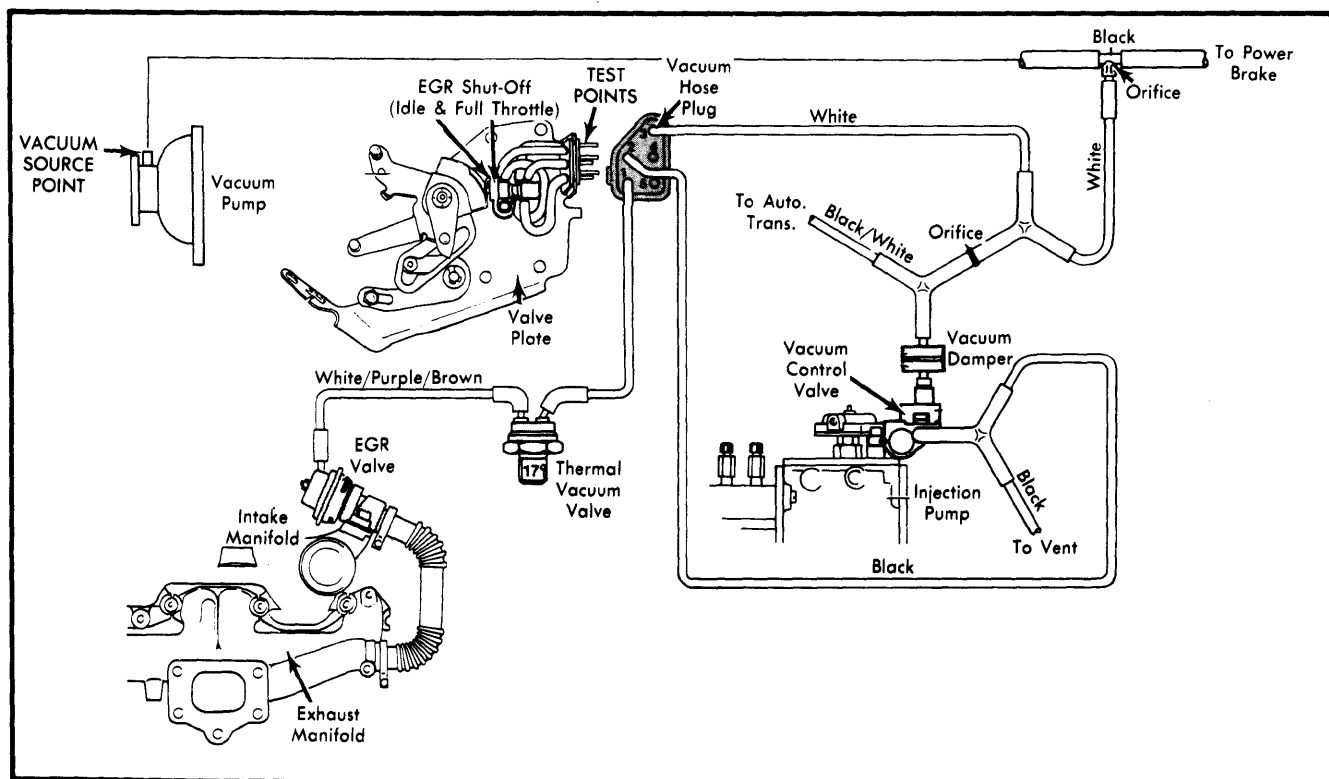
300 Series Diesel Exhaust Gas Recirculation (Turbo)
